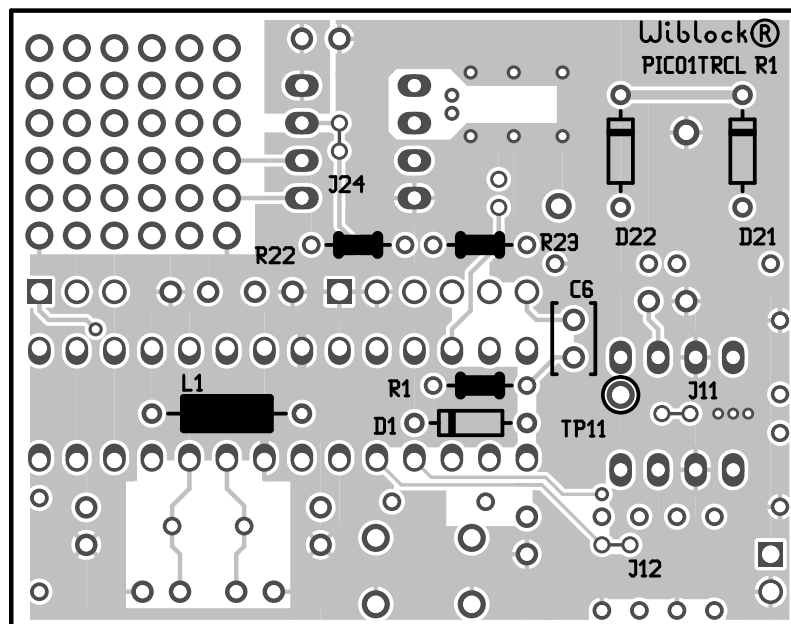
PICO1TRCL Bottom Side Assembly Drawing (Rev 1)
